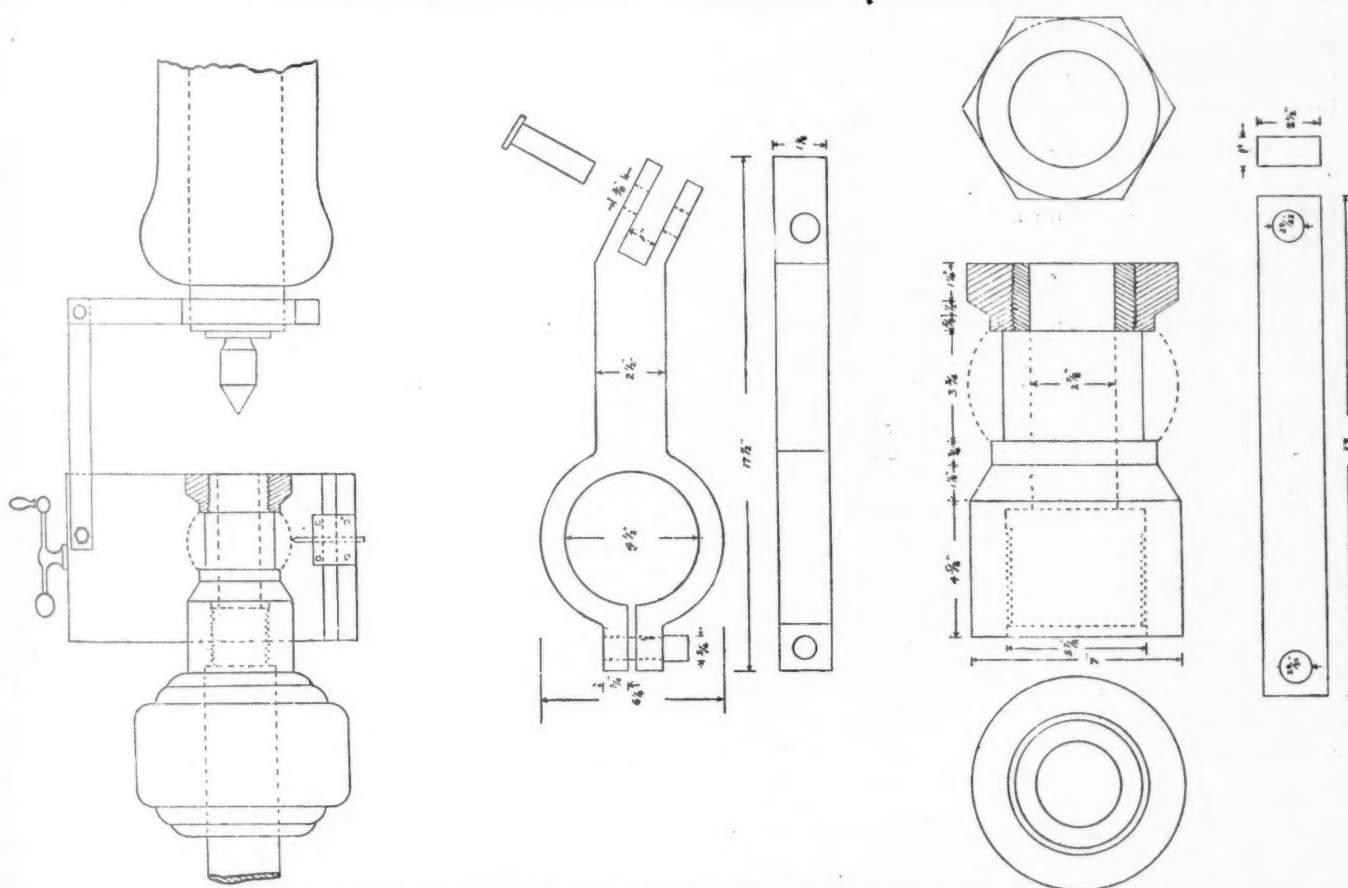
Device for Turning Ball Bushings for Front Crank Pins
